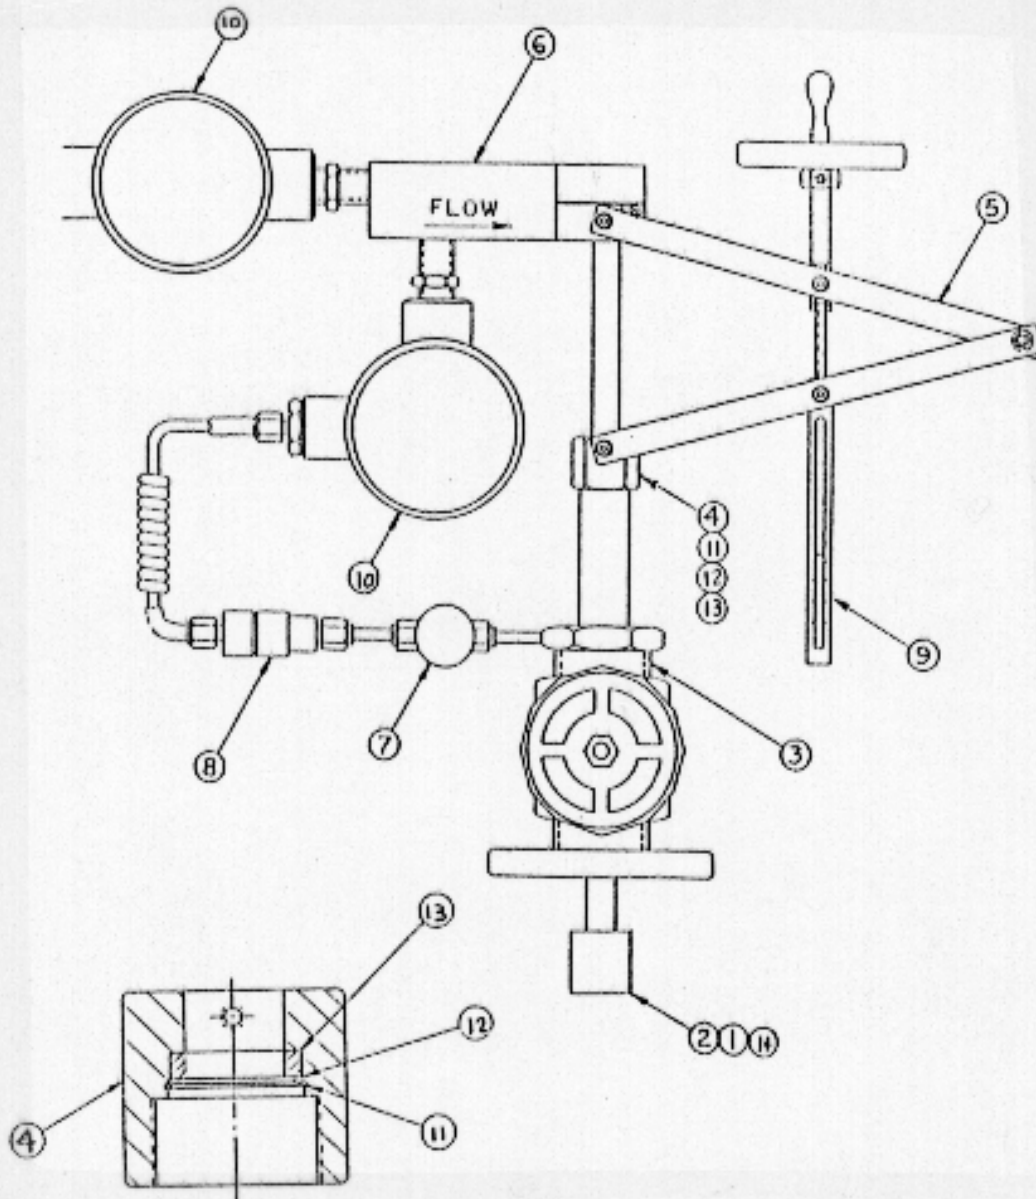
TL Low Profile Turbo-Probe<sup>3</sup> Assembly.
